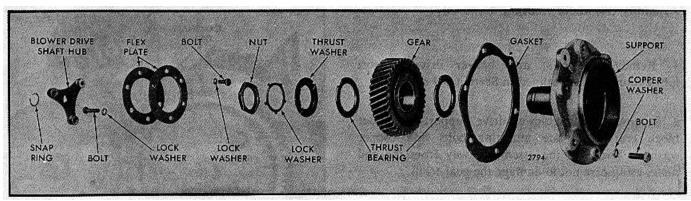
Blower Drive Gear and Support Assembly Details and Relative Location of warts
